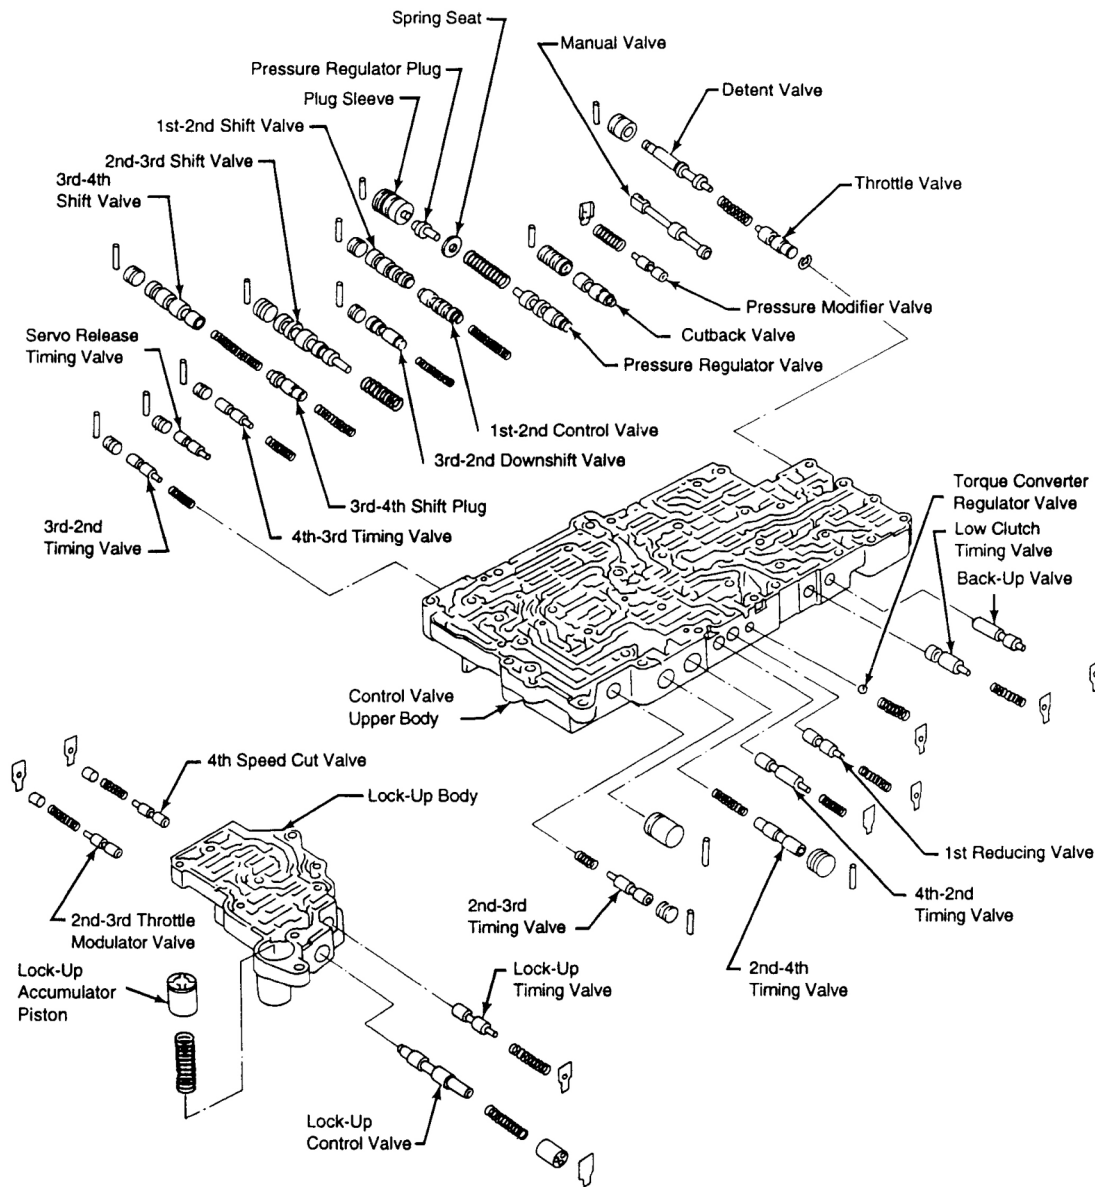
Exploded View Of Valve Body (1988 Maxima, 1988-89 Pulsar & Stanza)
